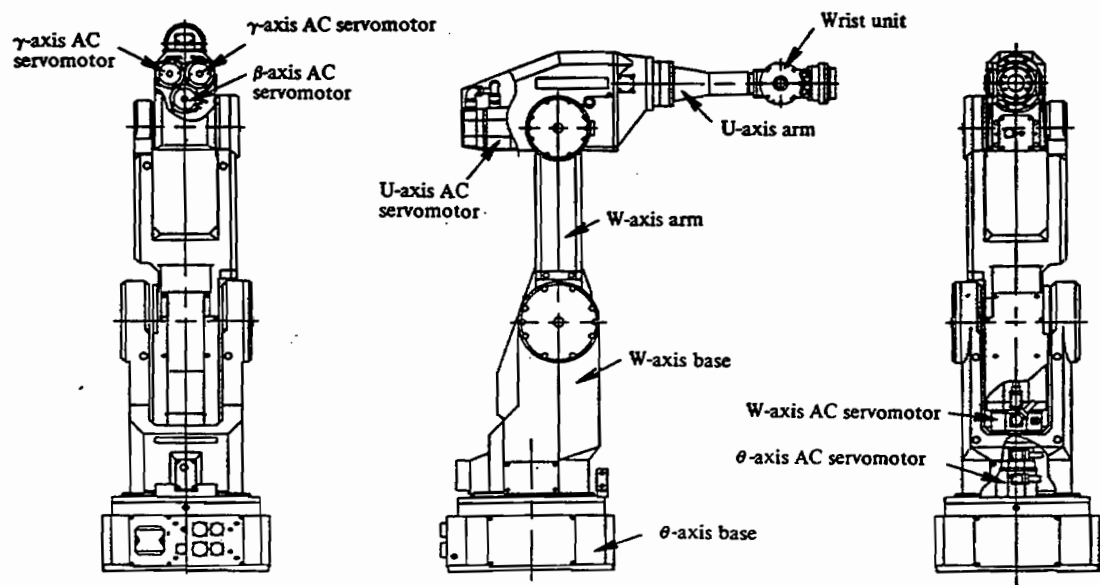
(b) Mechanical unit configuration (S-700 in-line wrist)
